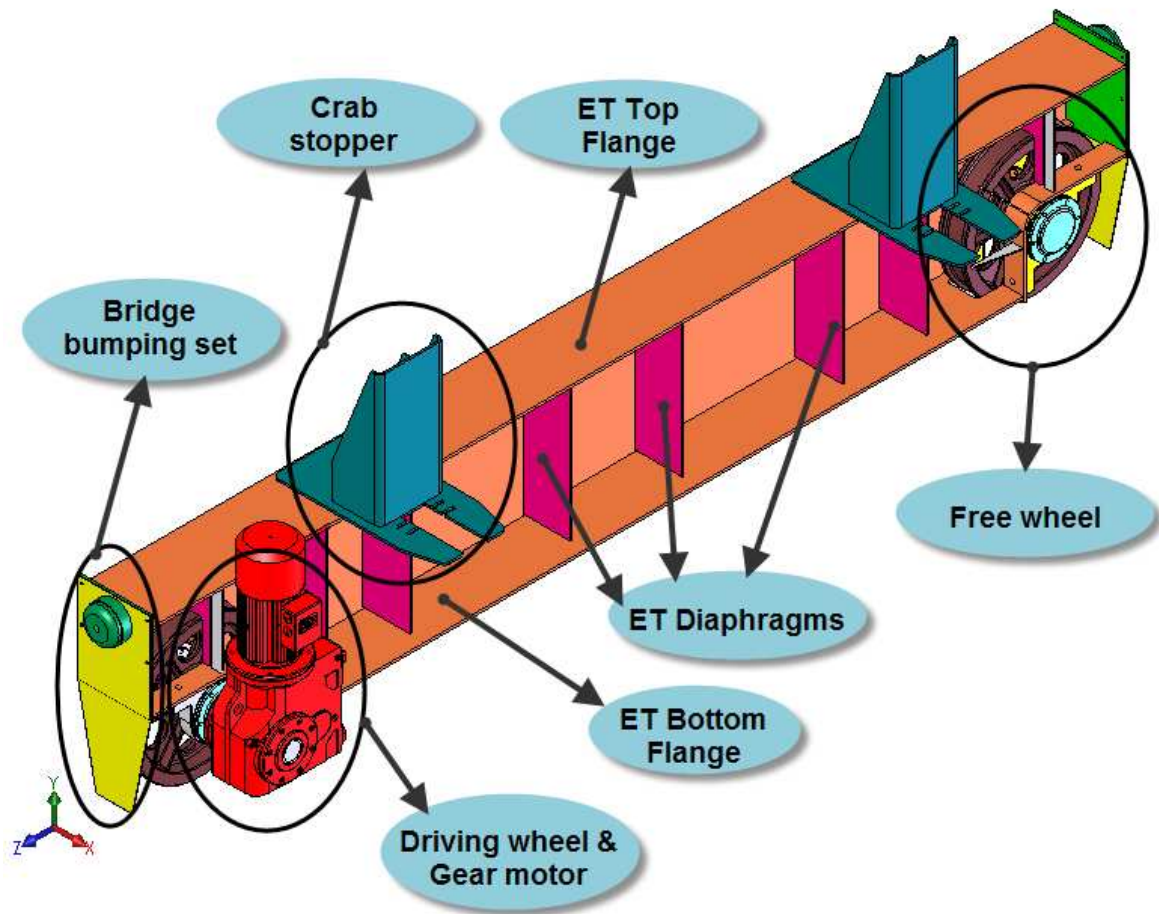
End truck (ET) assembly (side plate hidden)
